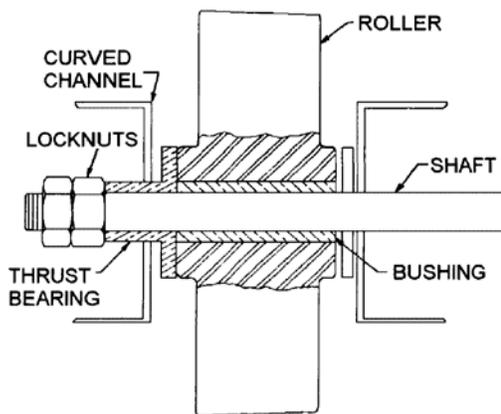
A typical tapered roll. Lock nuts on shaft can be tightened to bring the roller into contact with both rails.
